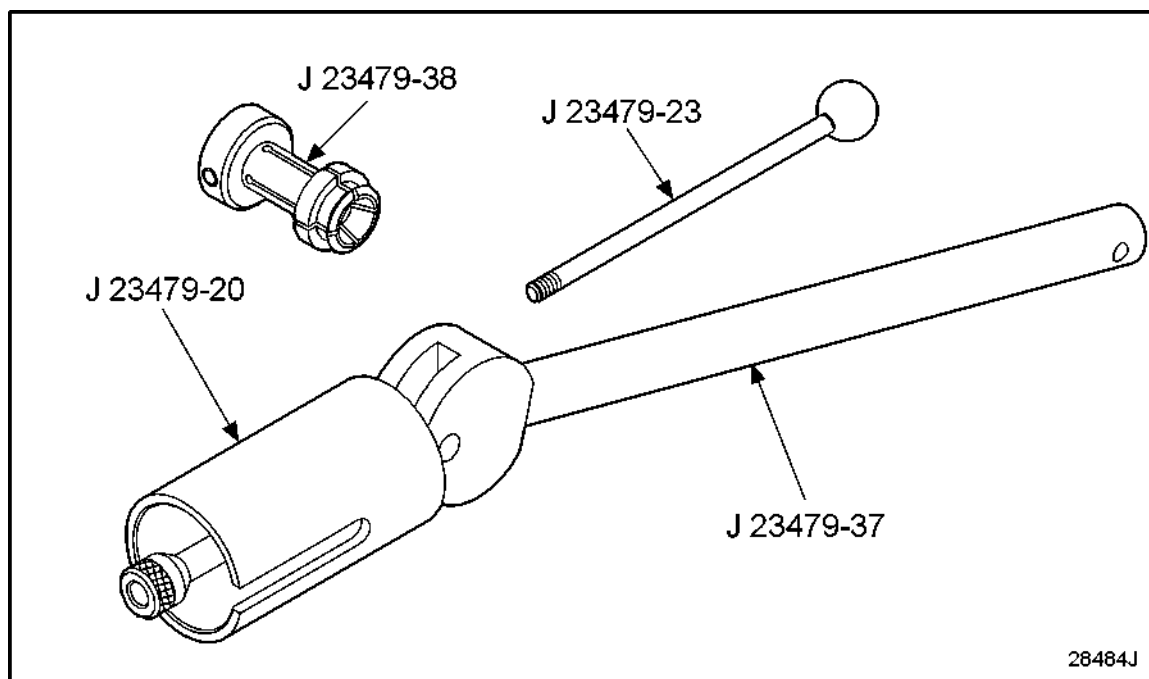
Valve St Insert Rem (Non-Ceramic HD),J 23479-49
